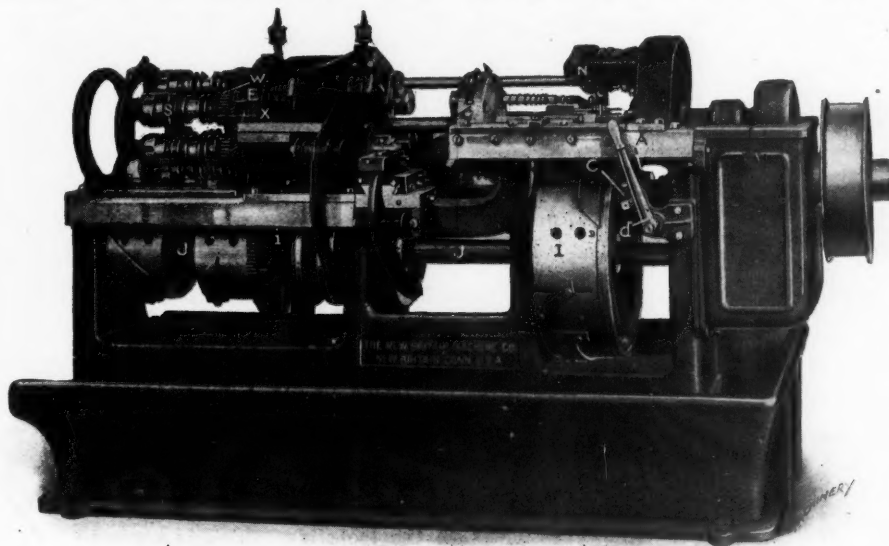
Front View of New Britain Six-spindle Automatic Screw Machine
